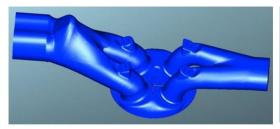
Perspective view of the combustion chamber geometry layout with 4-valves (upper view)
